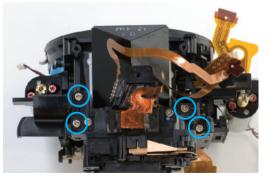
Position of Eyepiece Ass'y Screws (Top)
